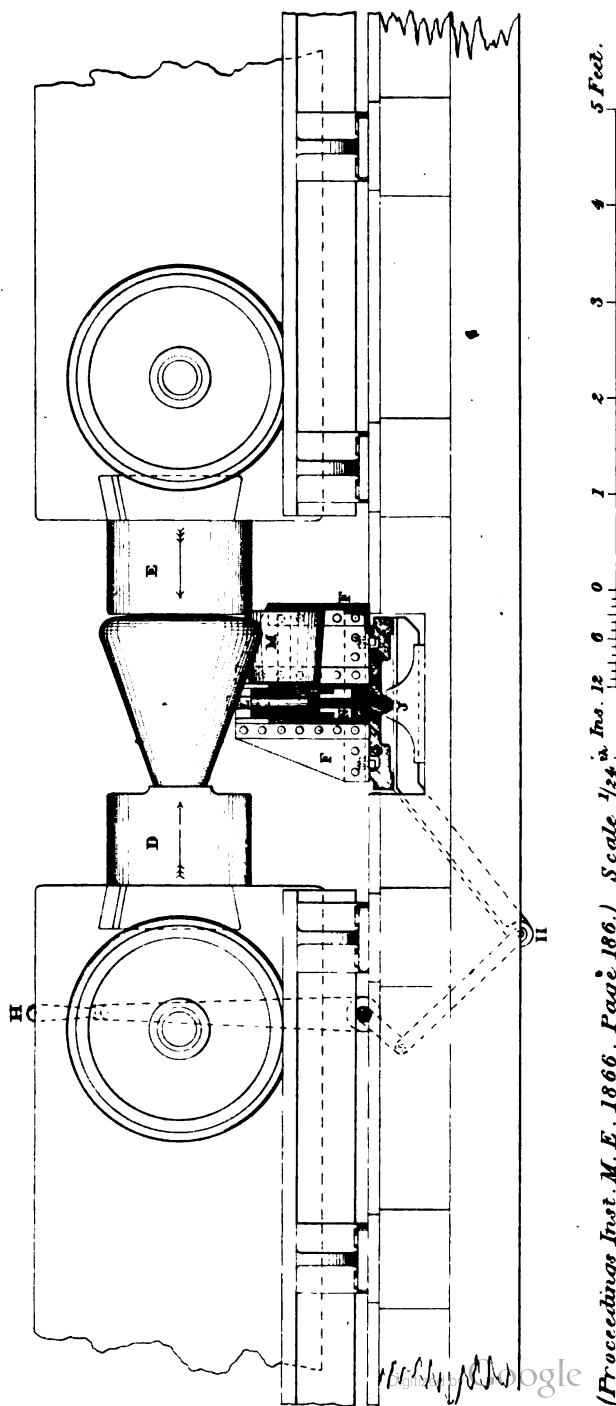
Side Elevation of Horizontal Duplex Hammer, hammering Bloom endways.
